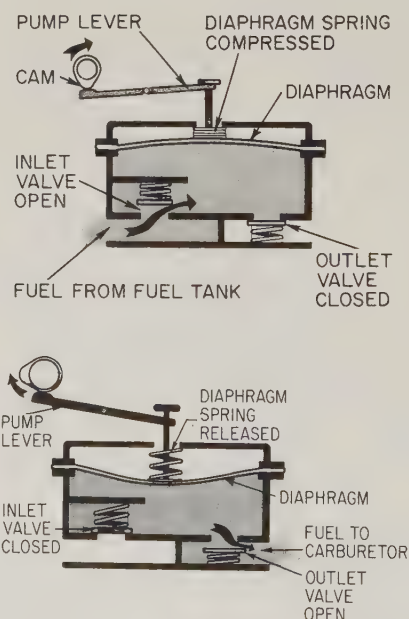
(Top) Action in the fuel pump when the pump lever is pushed down by the cam lobe on the eccentric. (Bottom) Action in the fuel pump when the lobe has moved out from under the pump lever.
